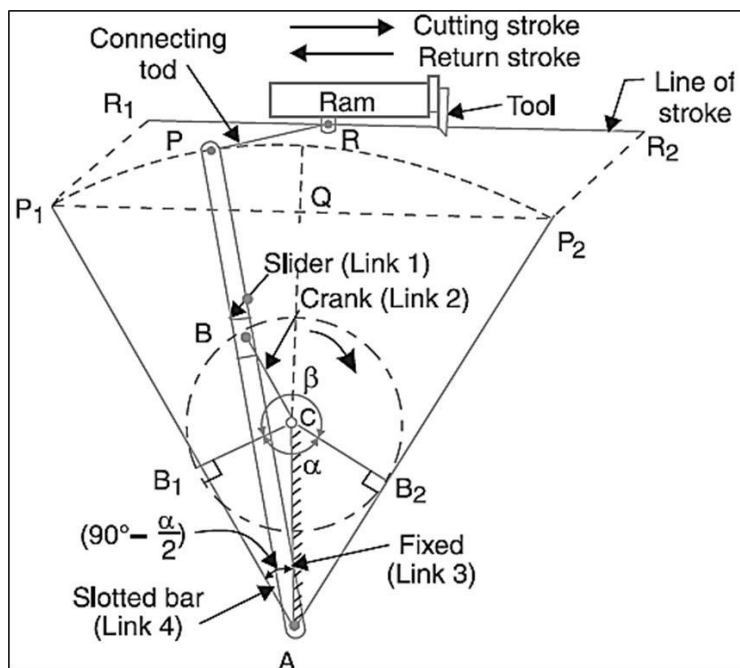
Crank and slotted lever quick return motion mechanism
